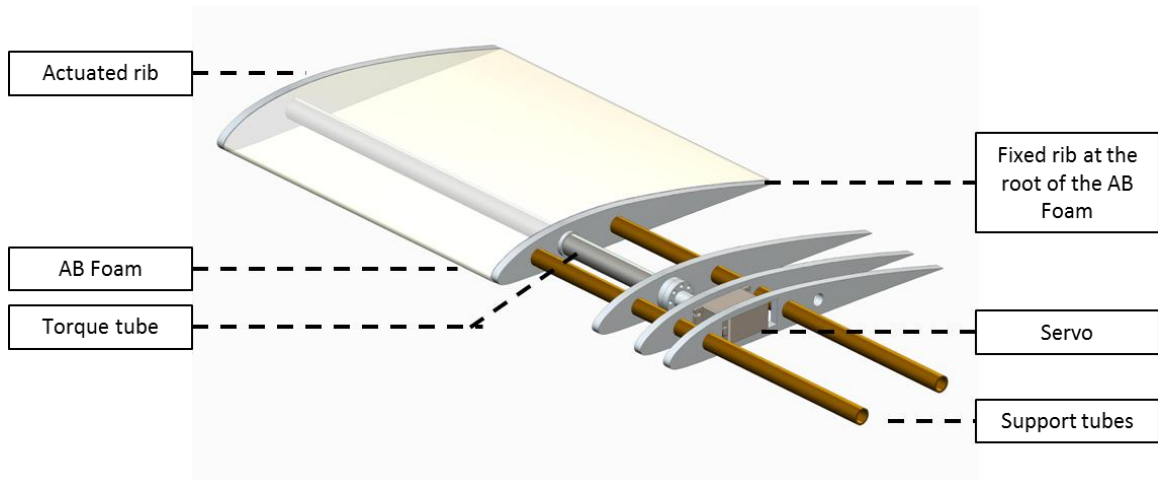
Twisting mechanism labeled drawing (carbon fiber skin over mechanism not shown)
